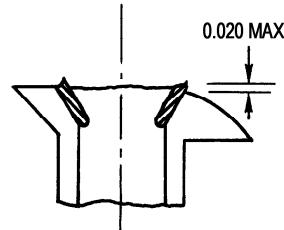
Olympic-Lok and Wiredrawn Blind Fastener Inspection
